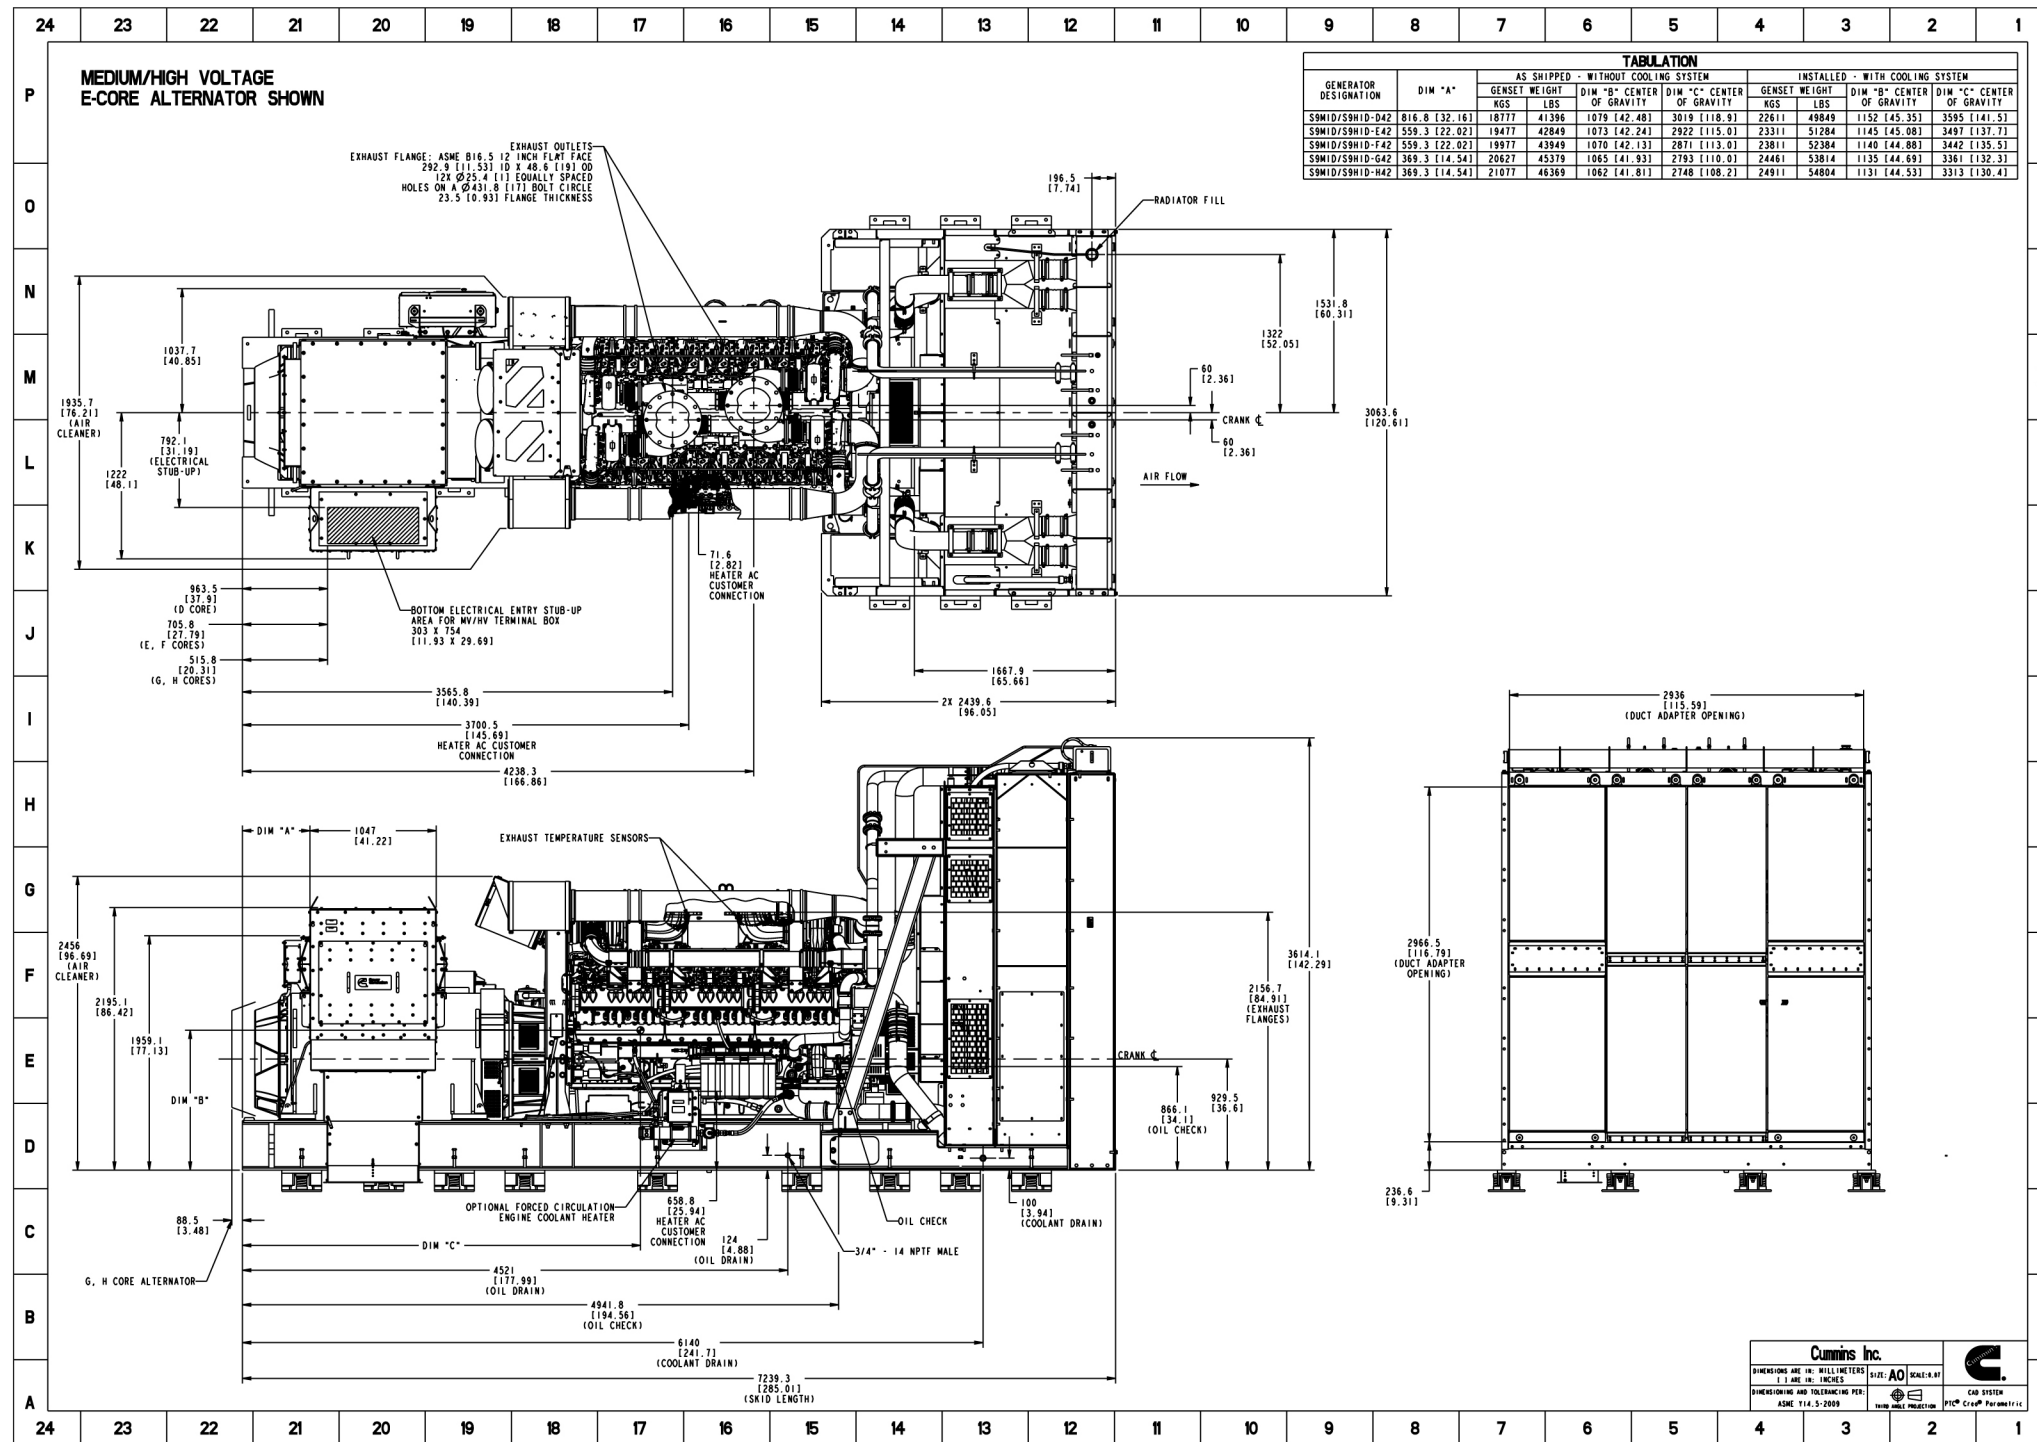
OUTLINE DRAWING (SHEET 2 OF 8)
